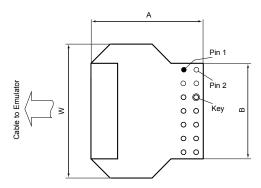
The dimensions of the 14-pin JTAGjet isolation probe for TMS320 style devices. Top view. A = 32.0 mm (1.28 in), B = 20.8 mm (0.82 in), W = 29.0 mm (1.14 in).
